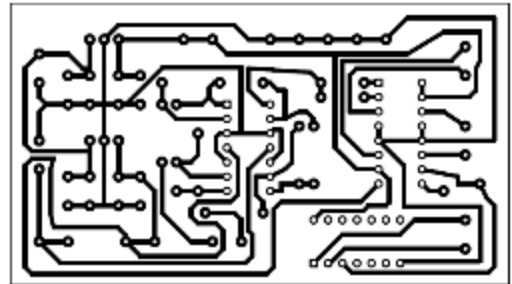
Power Supply, Motor Driver and Stop Circuit PCB Layout
